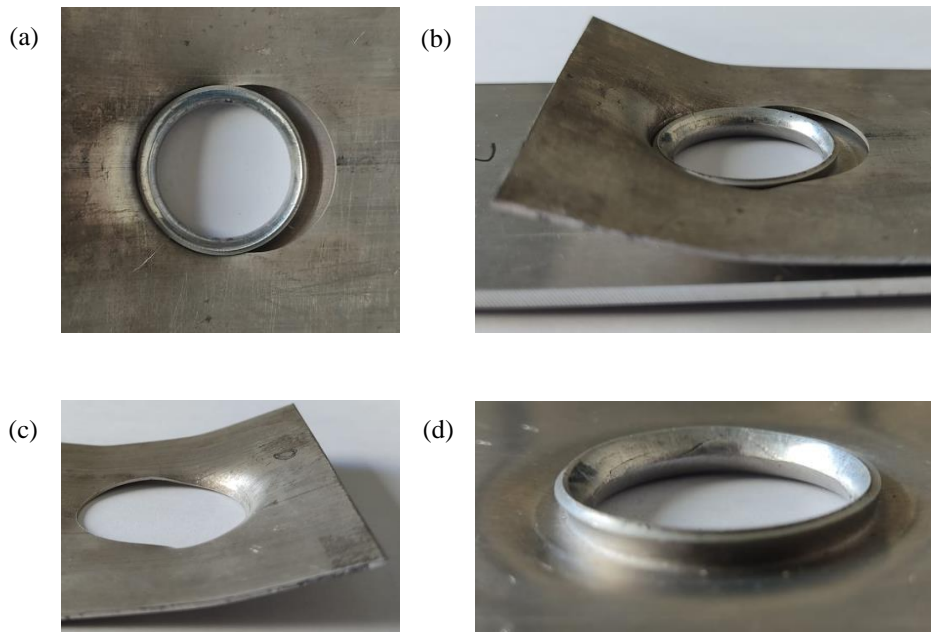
Aspect of a hole hemmed joint and sheets after the single lap shear test: (a) front view and (b) side view of the hole hemmed joint, (c) magnesium sheet and (d) aluminum sheet.
